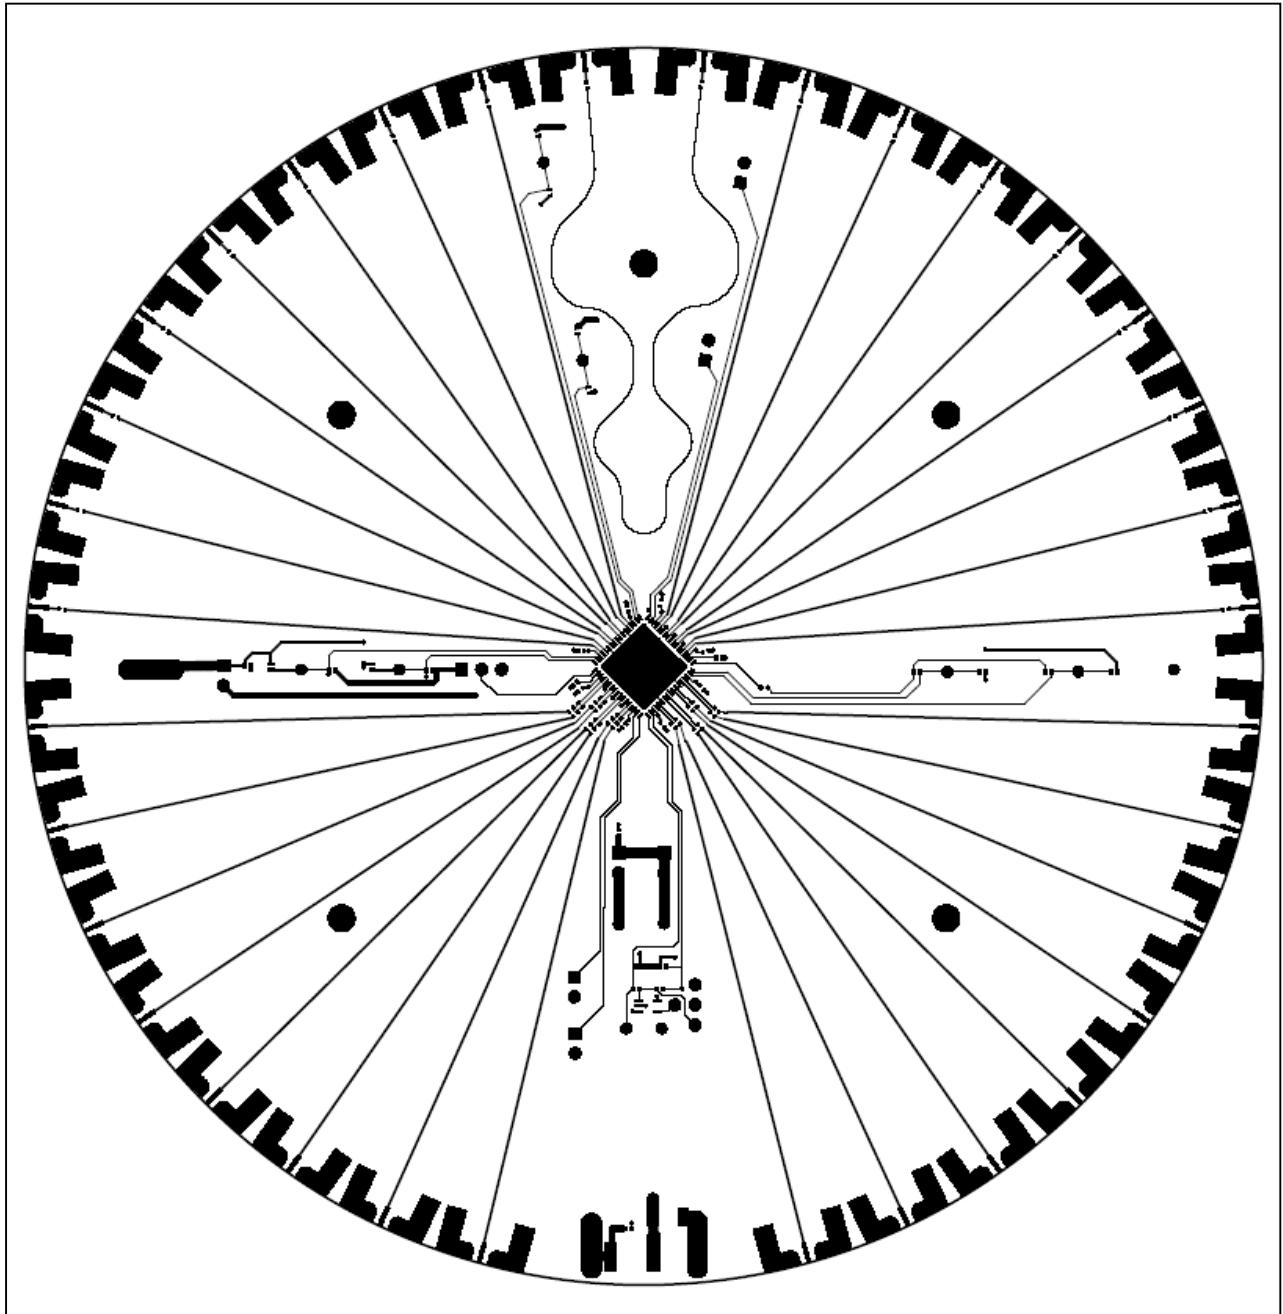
MAX3983 SMA Connector EV Kit PC Board Layout – Component Side
